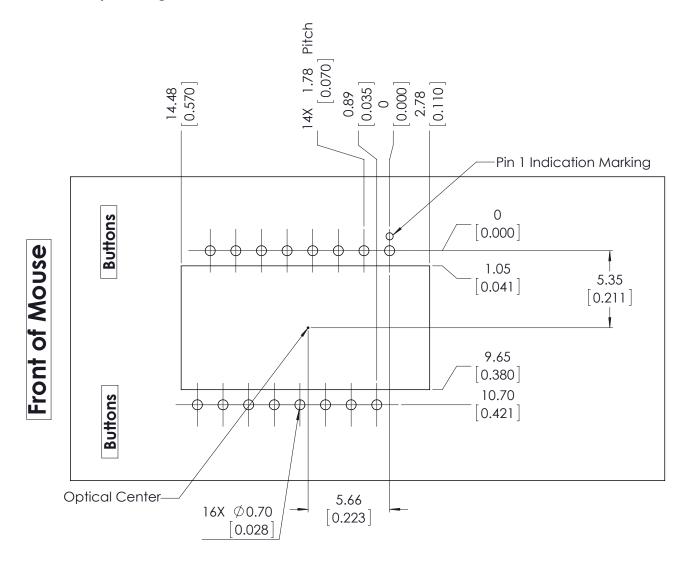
Recommended chip orientation, mechanical cutouts and spacing (Top View)
